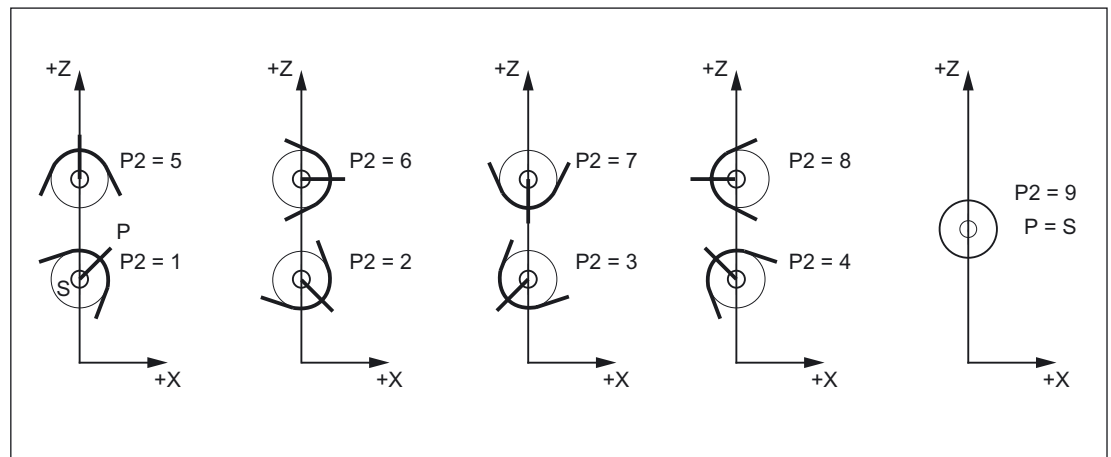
Tool parameter 2 (P2): Cutting edge position for vertical boring and turning mills
